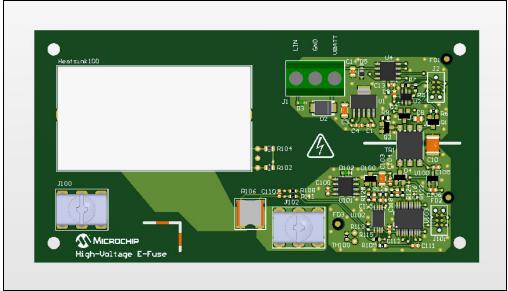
High-Voltage Auxiliary E-Fuse PCB Assembly (Top View).
